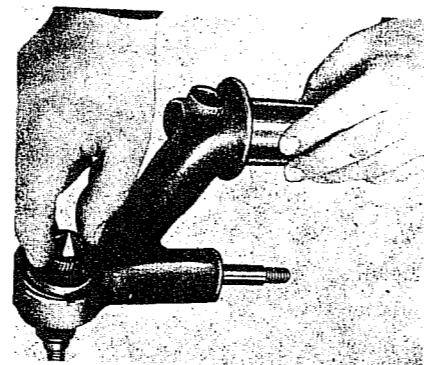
Measuring the ball joint wear with Special Tool VW 282 d.
